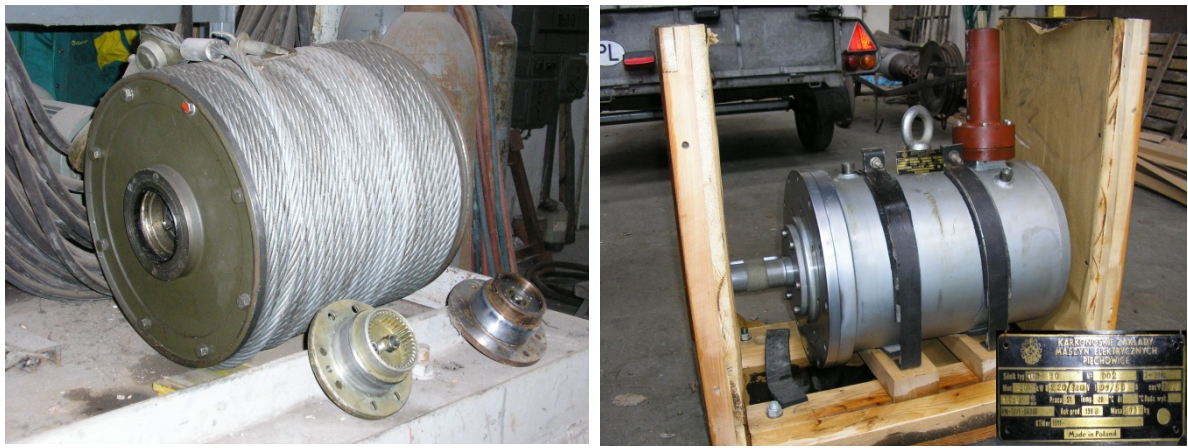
The NUR work equipment carrier components: lift and electric motor of the drive system.
